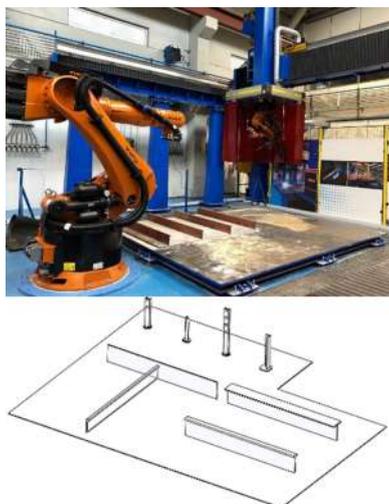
shows a side view of the work cell showing both robots (top), as well as a view of the realized demonstrator (bottom).
